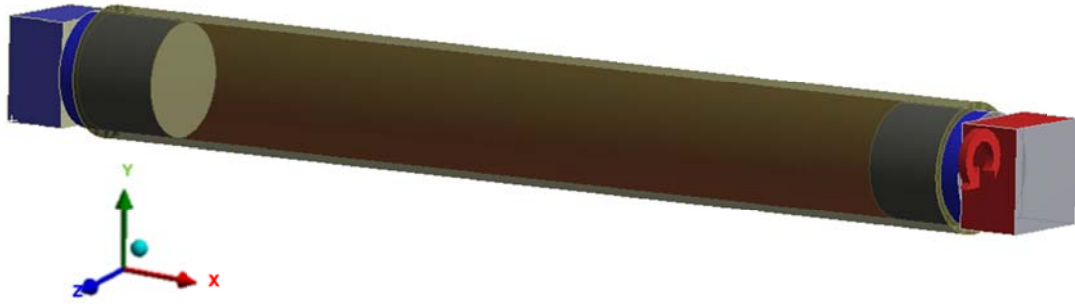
Model assembly - bonded contact of the steel inserts and CFRP cylinder.
